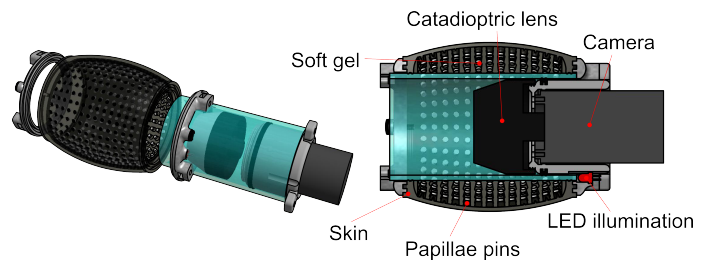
Exploded and Cross section view of cylindrical Tactip pill design.
